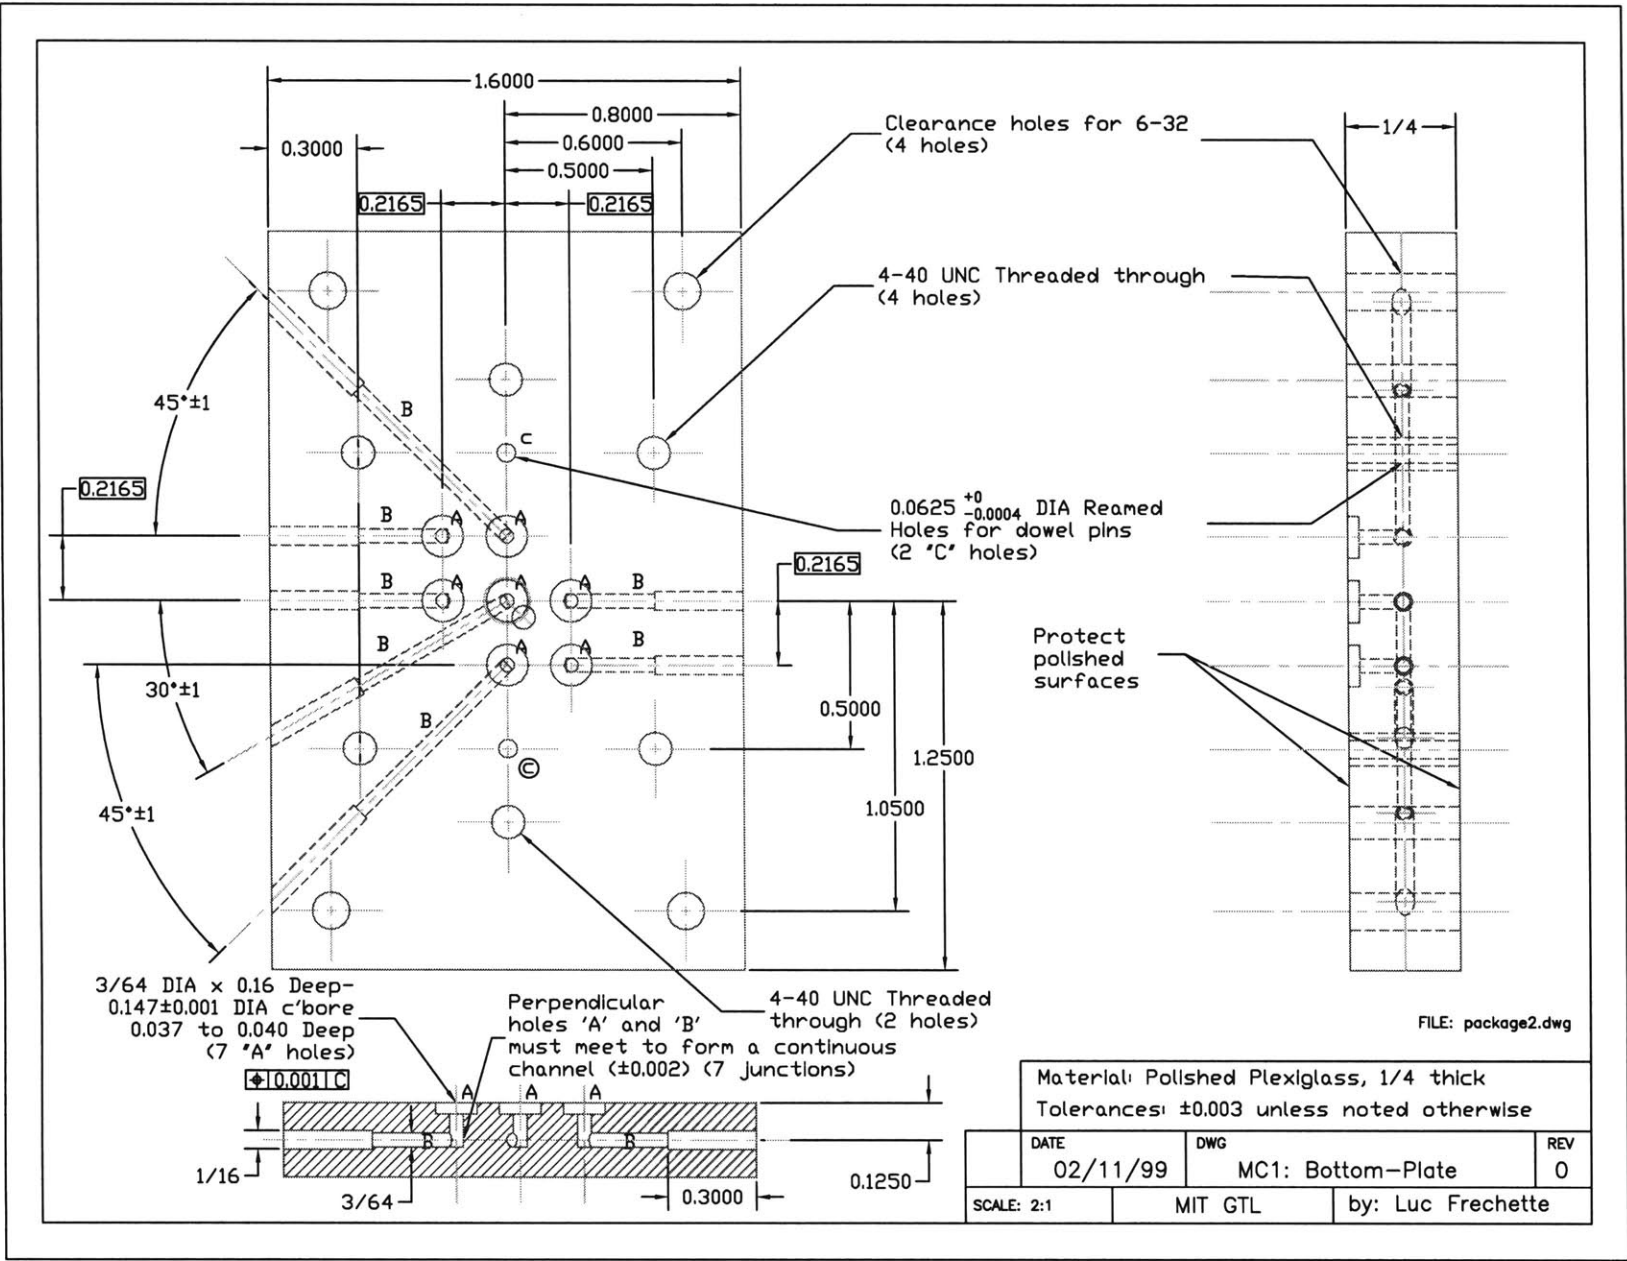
Technical drawings of the MC-Bearing rig and Motor-Compressor package - Bottom plate
